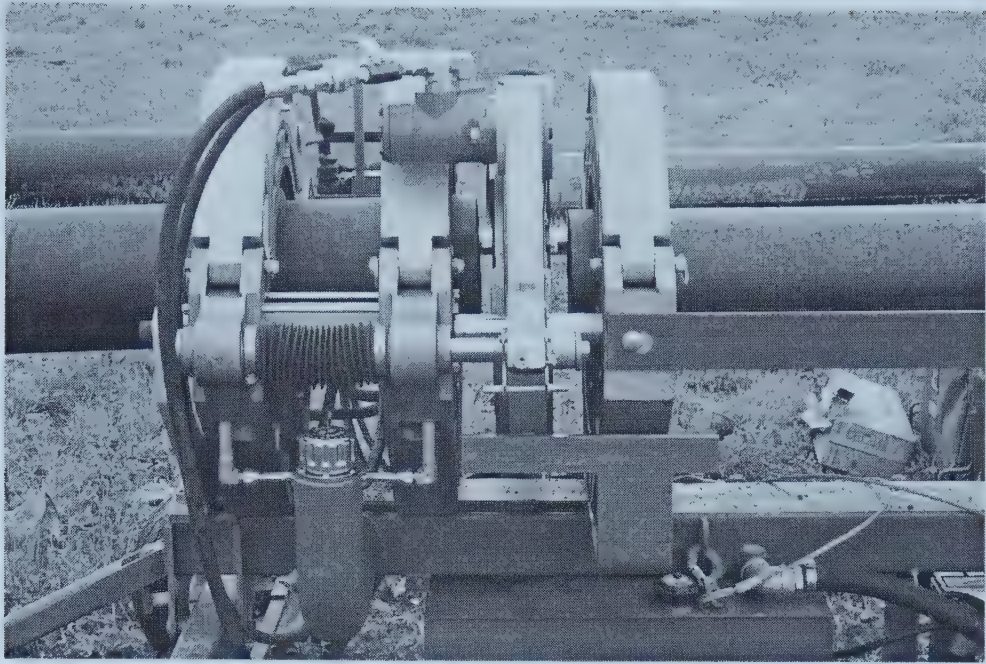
Butt Fusion Welding of a 200 mm Diameter HDPE Pipe
